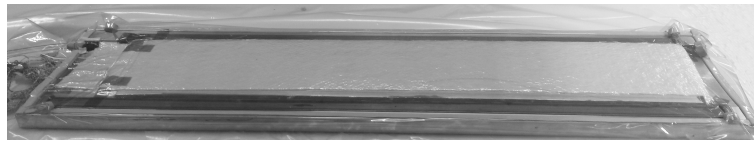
Vacuum bagging of the assembled wings to ensure proper bonding of both wing halves
